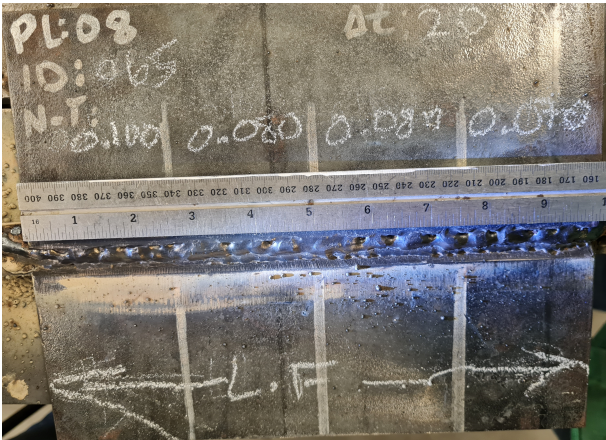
Example of a bad weld with lack of fusion taken from the eighth plate.
